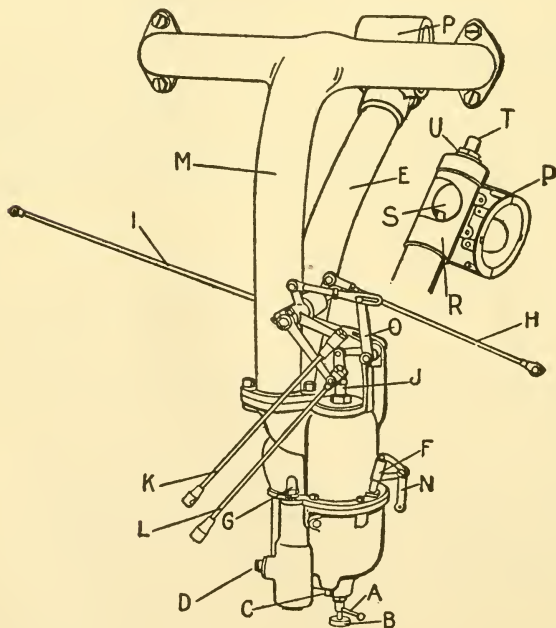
Center draught carburetter and connections. A, needle valve lock nut; B, needle valve; C, float chamber drain; D, fuel pipe; E, hot air pipe; F, primer plunger; G, float pin upper bearing; H, connection between intermediate lever and magneto operating lever; I, foot accelerator connection; J, throttle shutter; K, throttle control lower connection; L, ignition control lower connection; M, fuel inlet upper pipe; N, primer bell crank; O, throttle; P, hot air box; S, port hole; T, hot air adjustment; U, lock nut for same.
